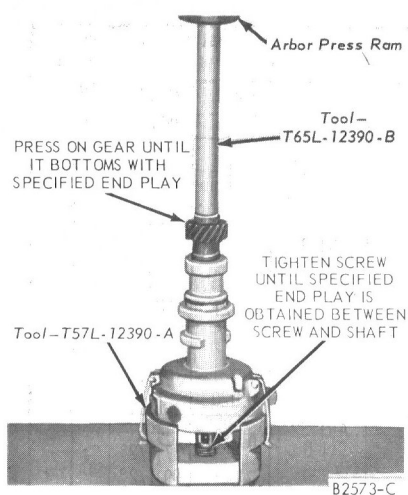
Installing New Shaft and Gear—6- Cylinder Engine
